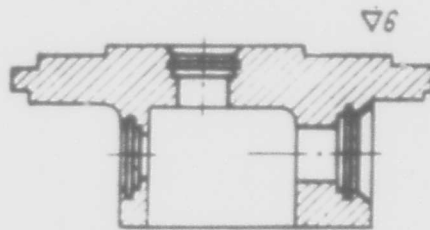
Boring of mutually perpendicular holes in housing parts on special three-way semiautomatic boring machine.
